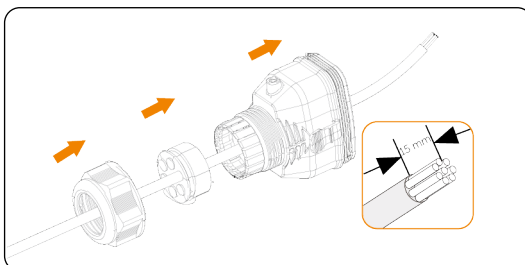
Threading the cable without the RJ45 terminal and stripping
